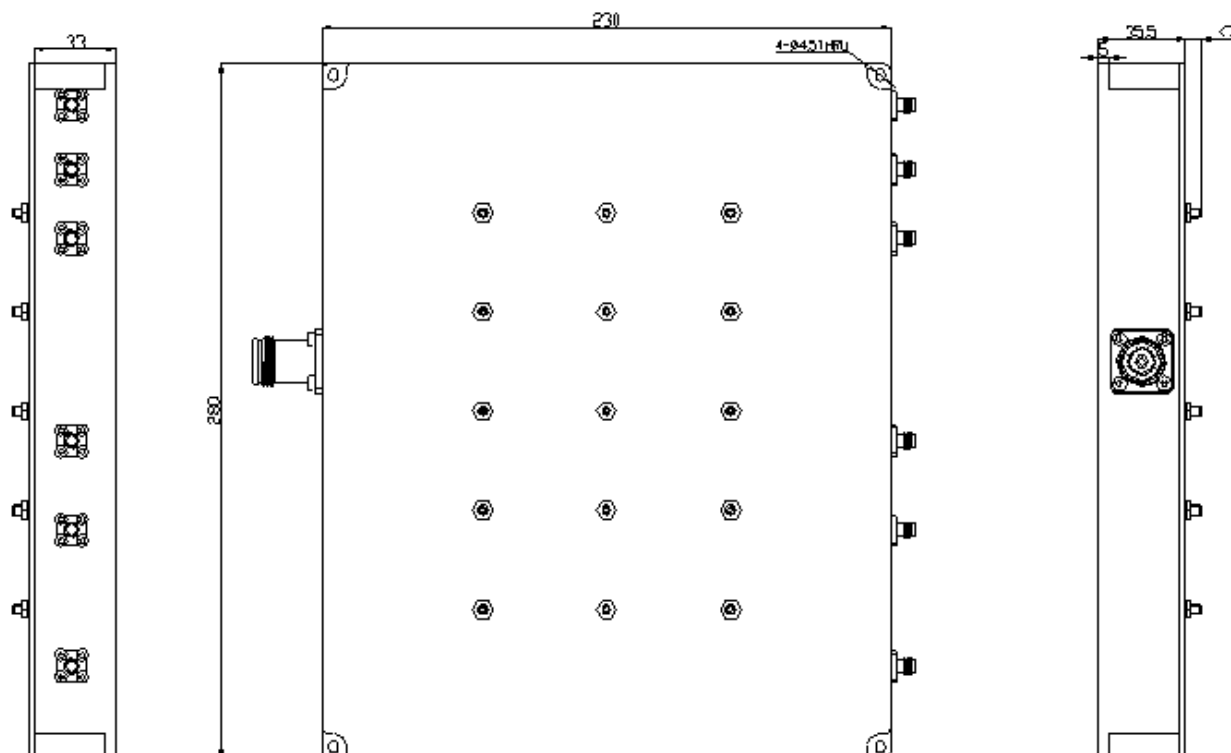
JX-CC6-758M4200M-4310FSF front panel layout
